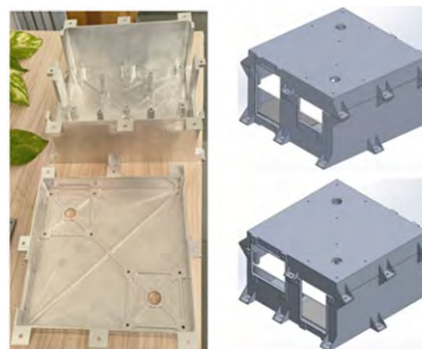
PS4 Langmuir Probe Assembly (2-Tray Package)
